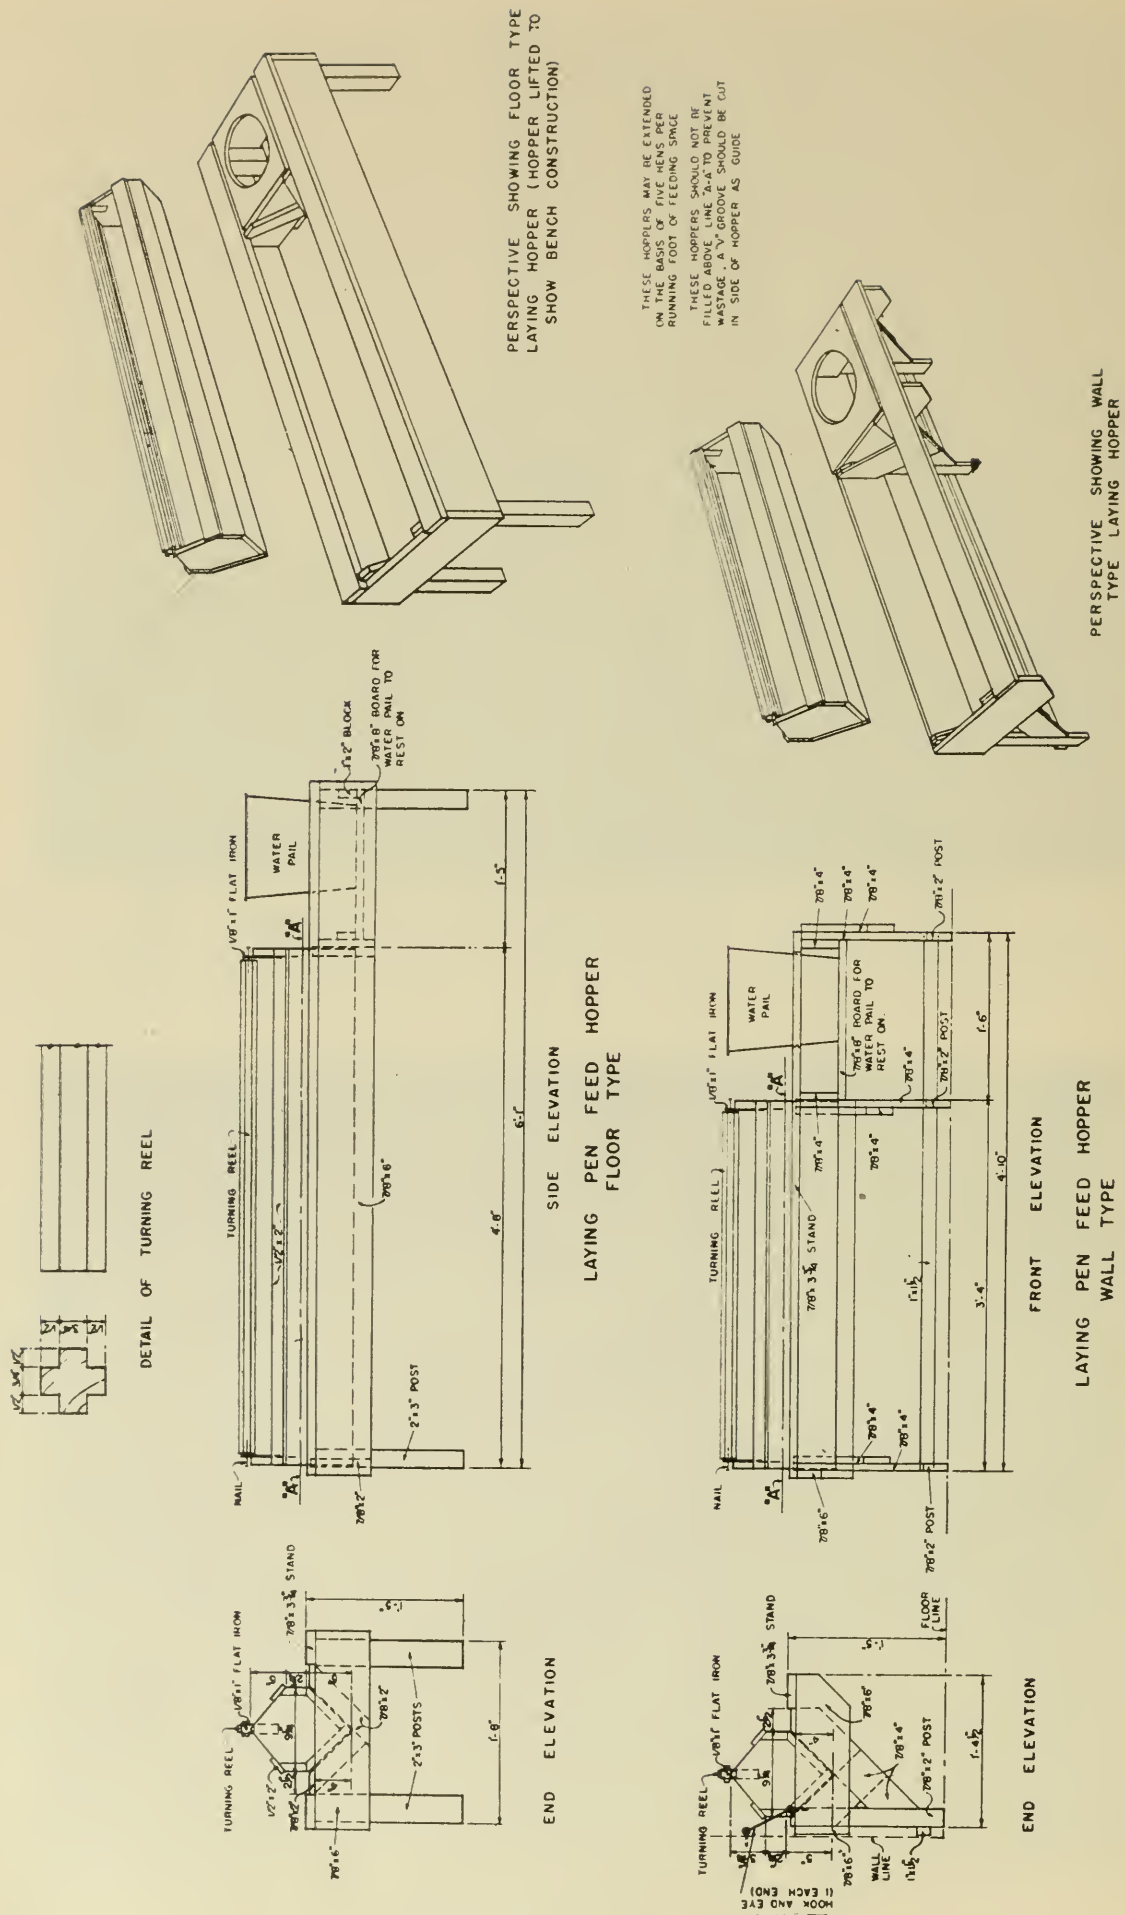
Plans for wall hopper and adaptation to floor stand.
